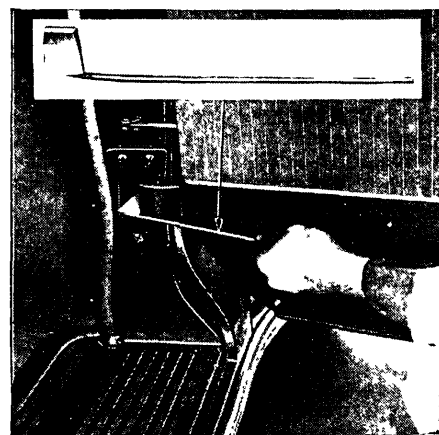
Adjusting door closer to body. Insert shows wedge-shaped tool which can easily be made of any hard material
